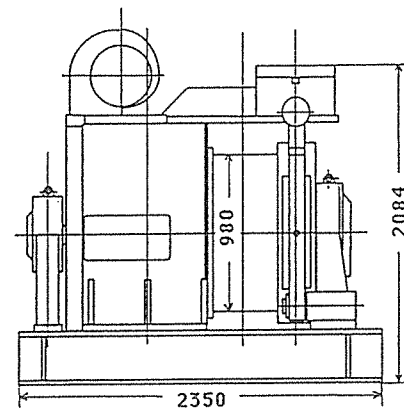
SIDE VIEW OF 120KW TRACTION MACHINE
